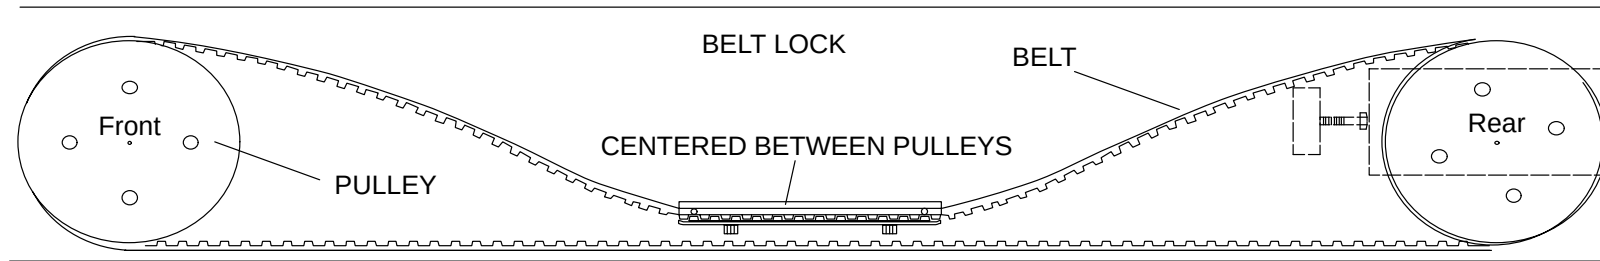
HORIZONTAL BELT BEFORE ADJUSTMENT
